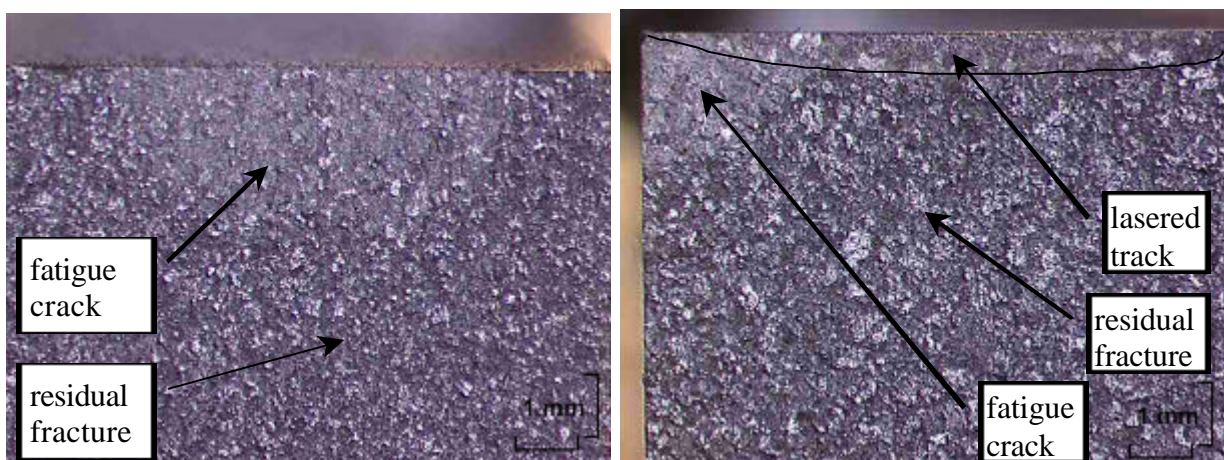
Fracture Surfaces with Edge and Half-Penny Shape Fatigue Cracks
